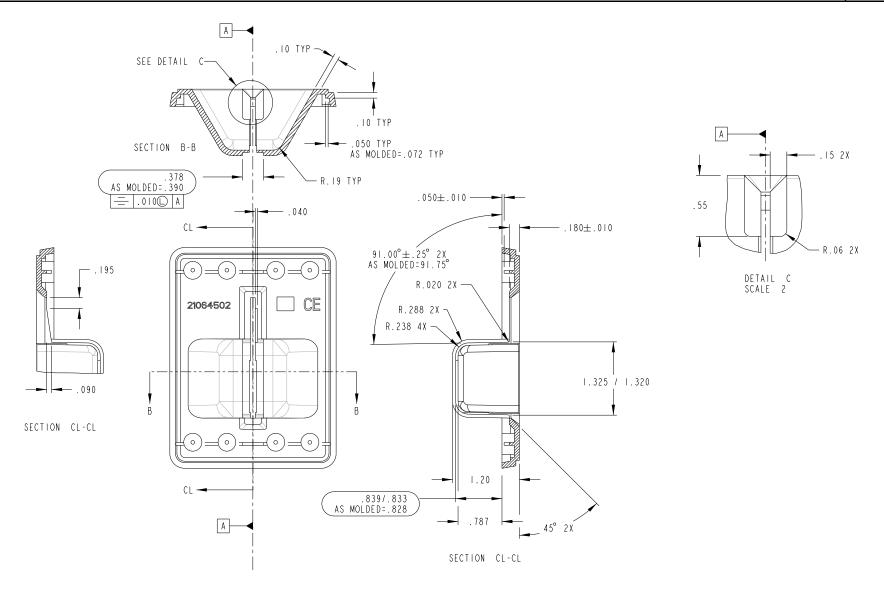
Dimensions for Flat-Faced Bezel Design, Sheet 2
